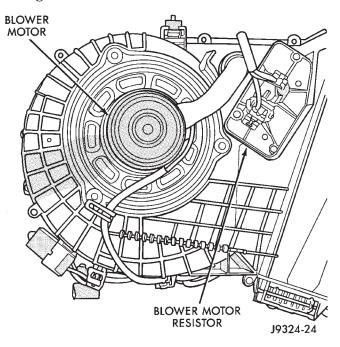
Blower Motor Resistor or Power ModuleRemove/Install
